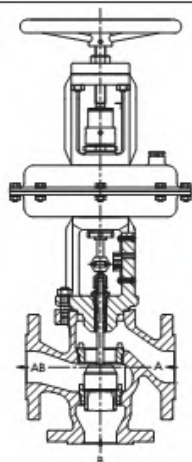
Type 3244-1 Pneumatic Control Valve with Type 3244 Three-way Valve (plug arrangement for mixing service, DN 15 to 25 for diverting service as well, and type 3271 Actuator with additional handwheel)
